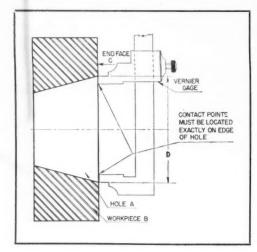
Drawing of a workpiece having a tapered hole, and method of measuring the mouth diameter by using a vernier gage.
